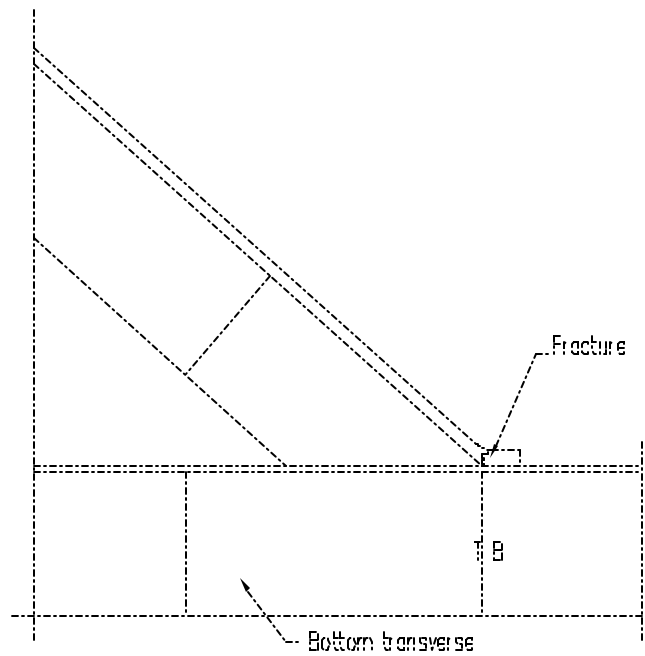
Fractured wing tank deck transverse bracket, face plate sniped.
